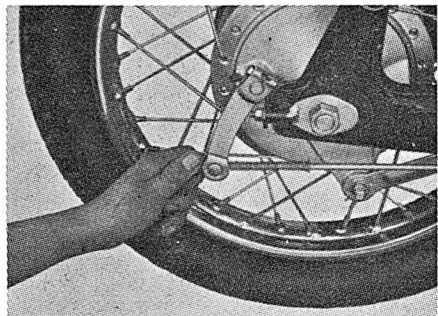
An adjuster nut is provided at end of rear brake rod on some models as shown. Adjustment of other models may be similar to front wheel shown in Fig. 2-41.
